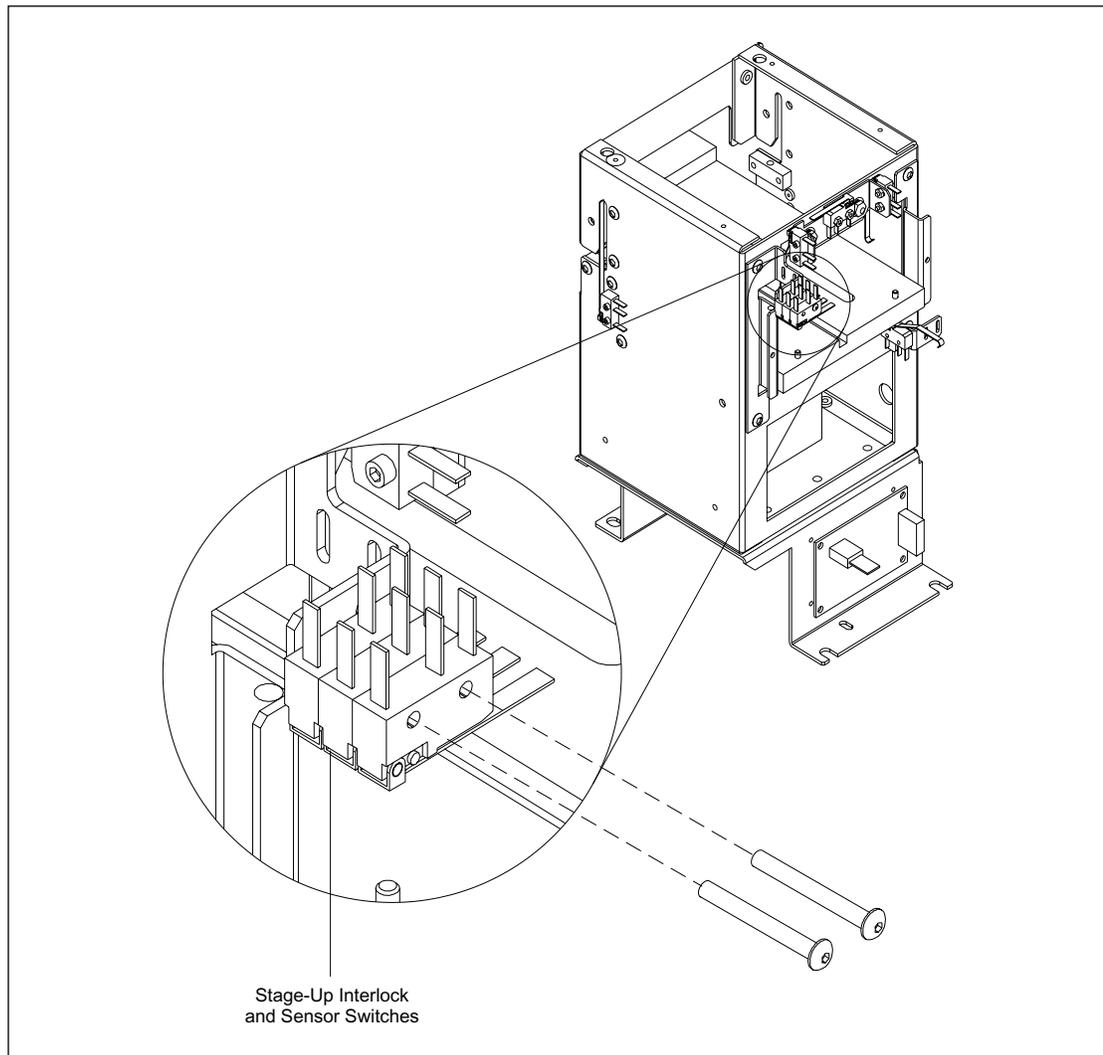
Cathode Stage-Up Interlock and Sensor Switch Mounting.
